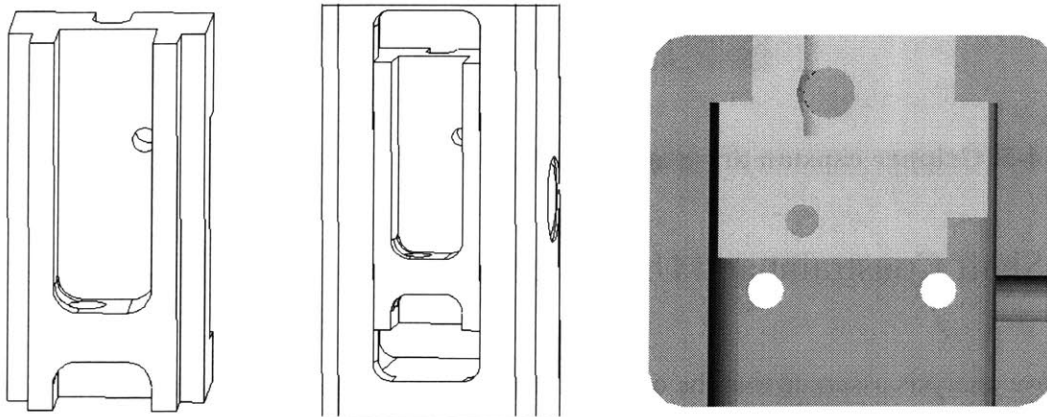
Final linear guide design for the gripper cartridge. At left, the final cartridge design having two bearing surfaces; shown mating with the housing in back view at center, and in cross-section at right.
